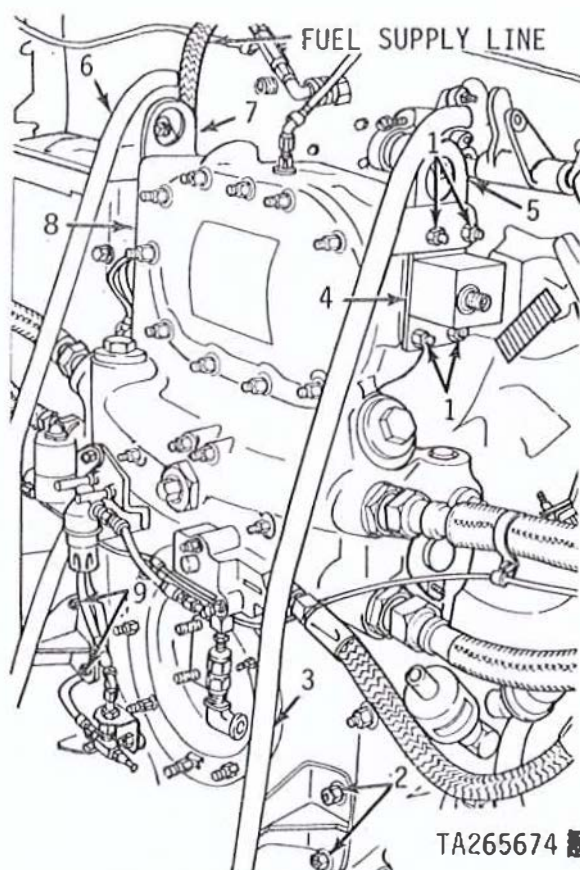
Removing or installing cooling fan shroud, model AVDS-1790-2DR engine.
